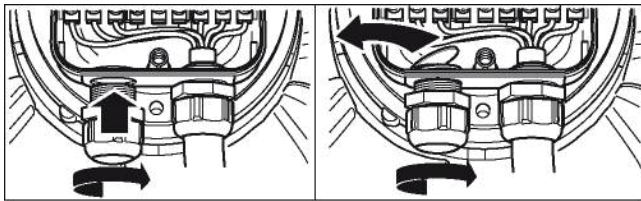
Screenshot of a terminal box showing the process of opening a screwed cable gland.
